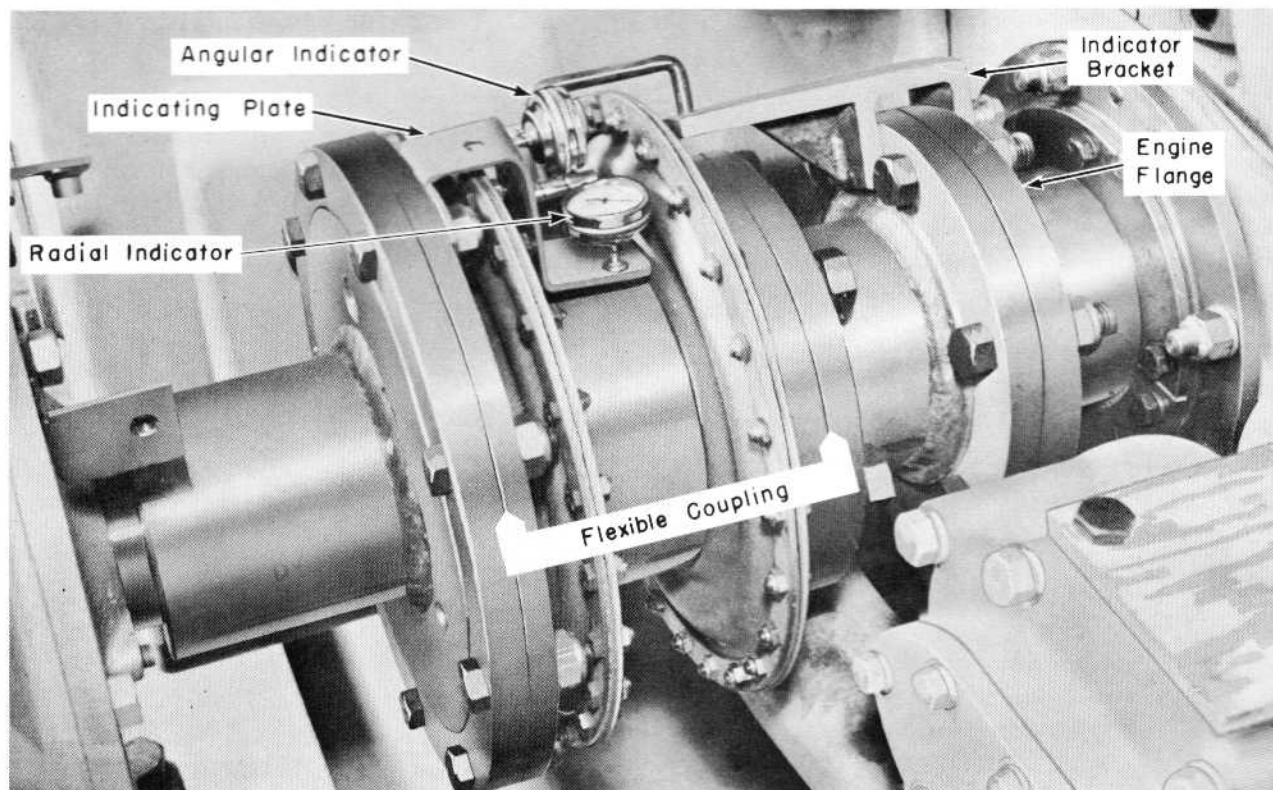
Dial Indicator Location For Alignment Of Coupling 8198236
